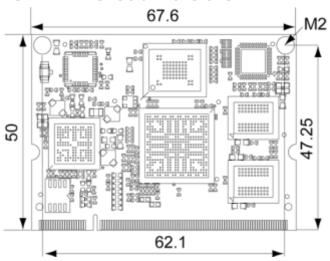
TDM-3730 dimensions (Dimensions in mm)
